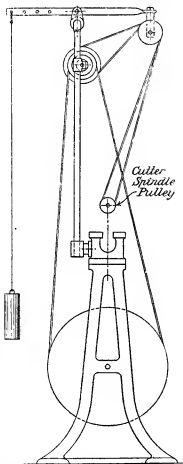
Arrangement of overhead gear commonly used for treddle lathe
